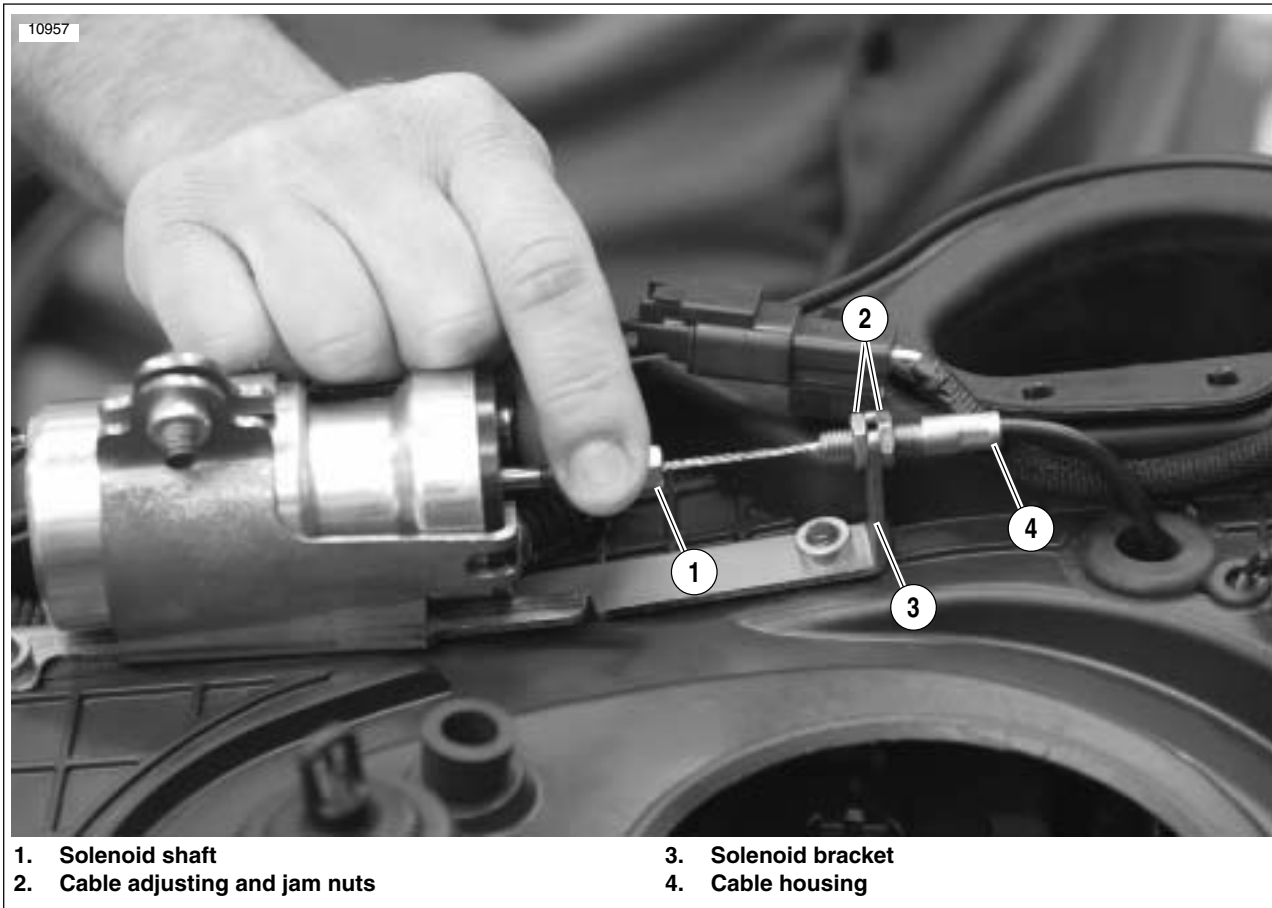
Checking for Freeplay in the Solenoid Shaft in the Fully Retracted Position
